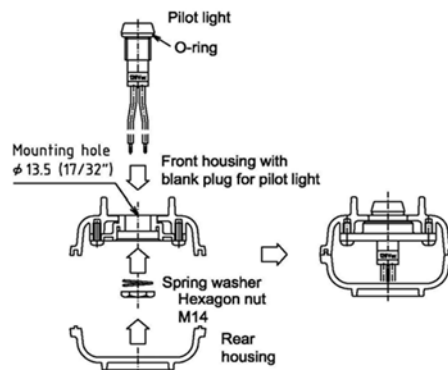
Cross-section view of Pilot Light Installation near Pushbuttons
